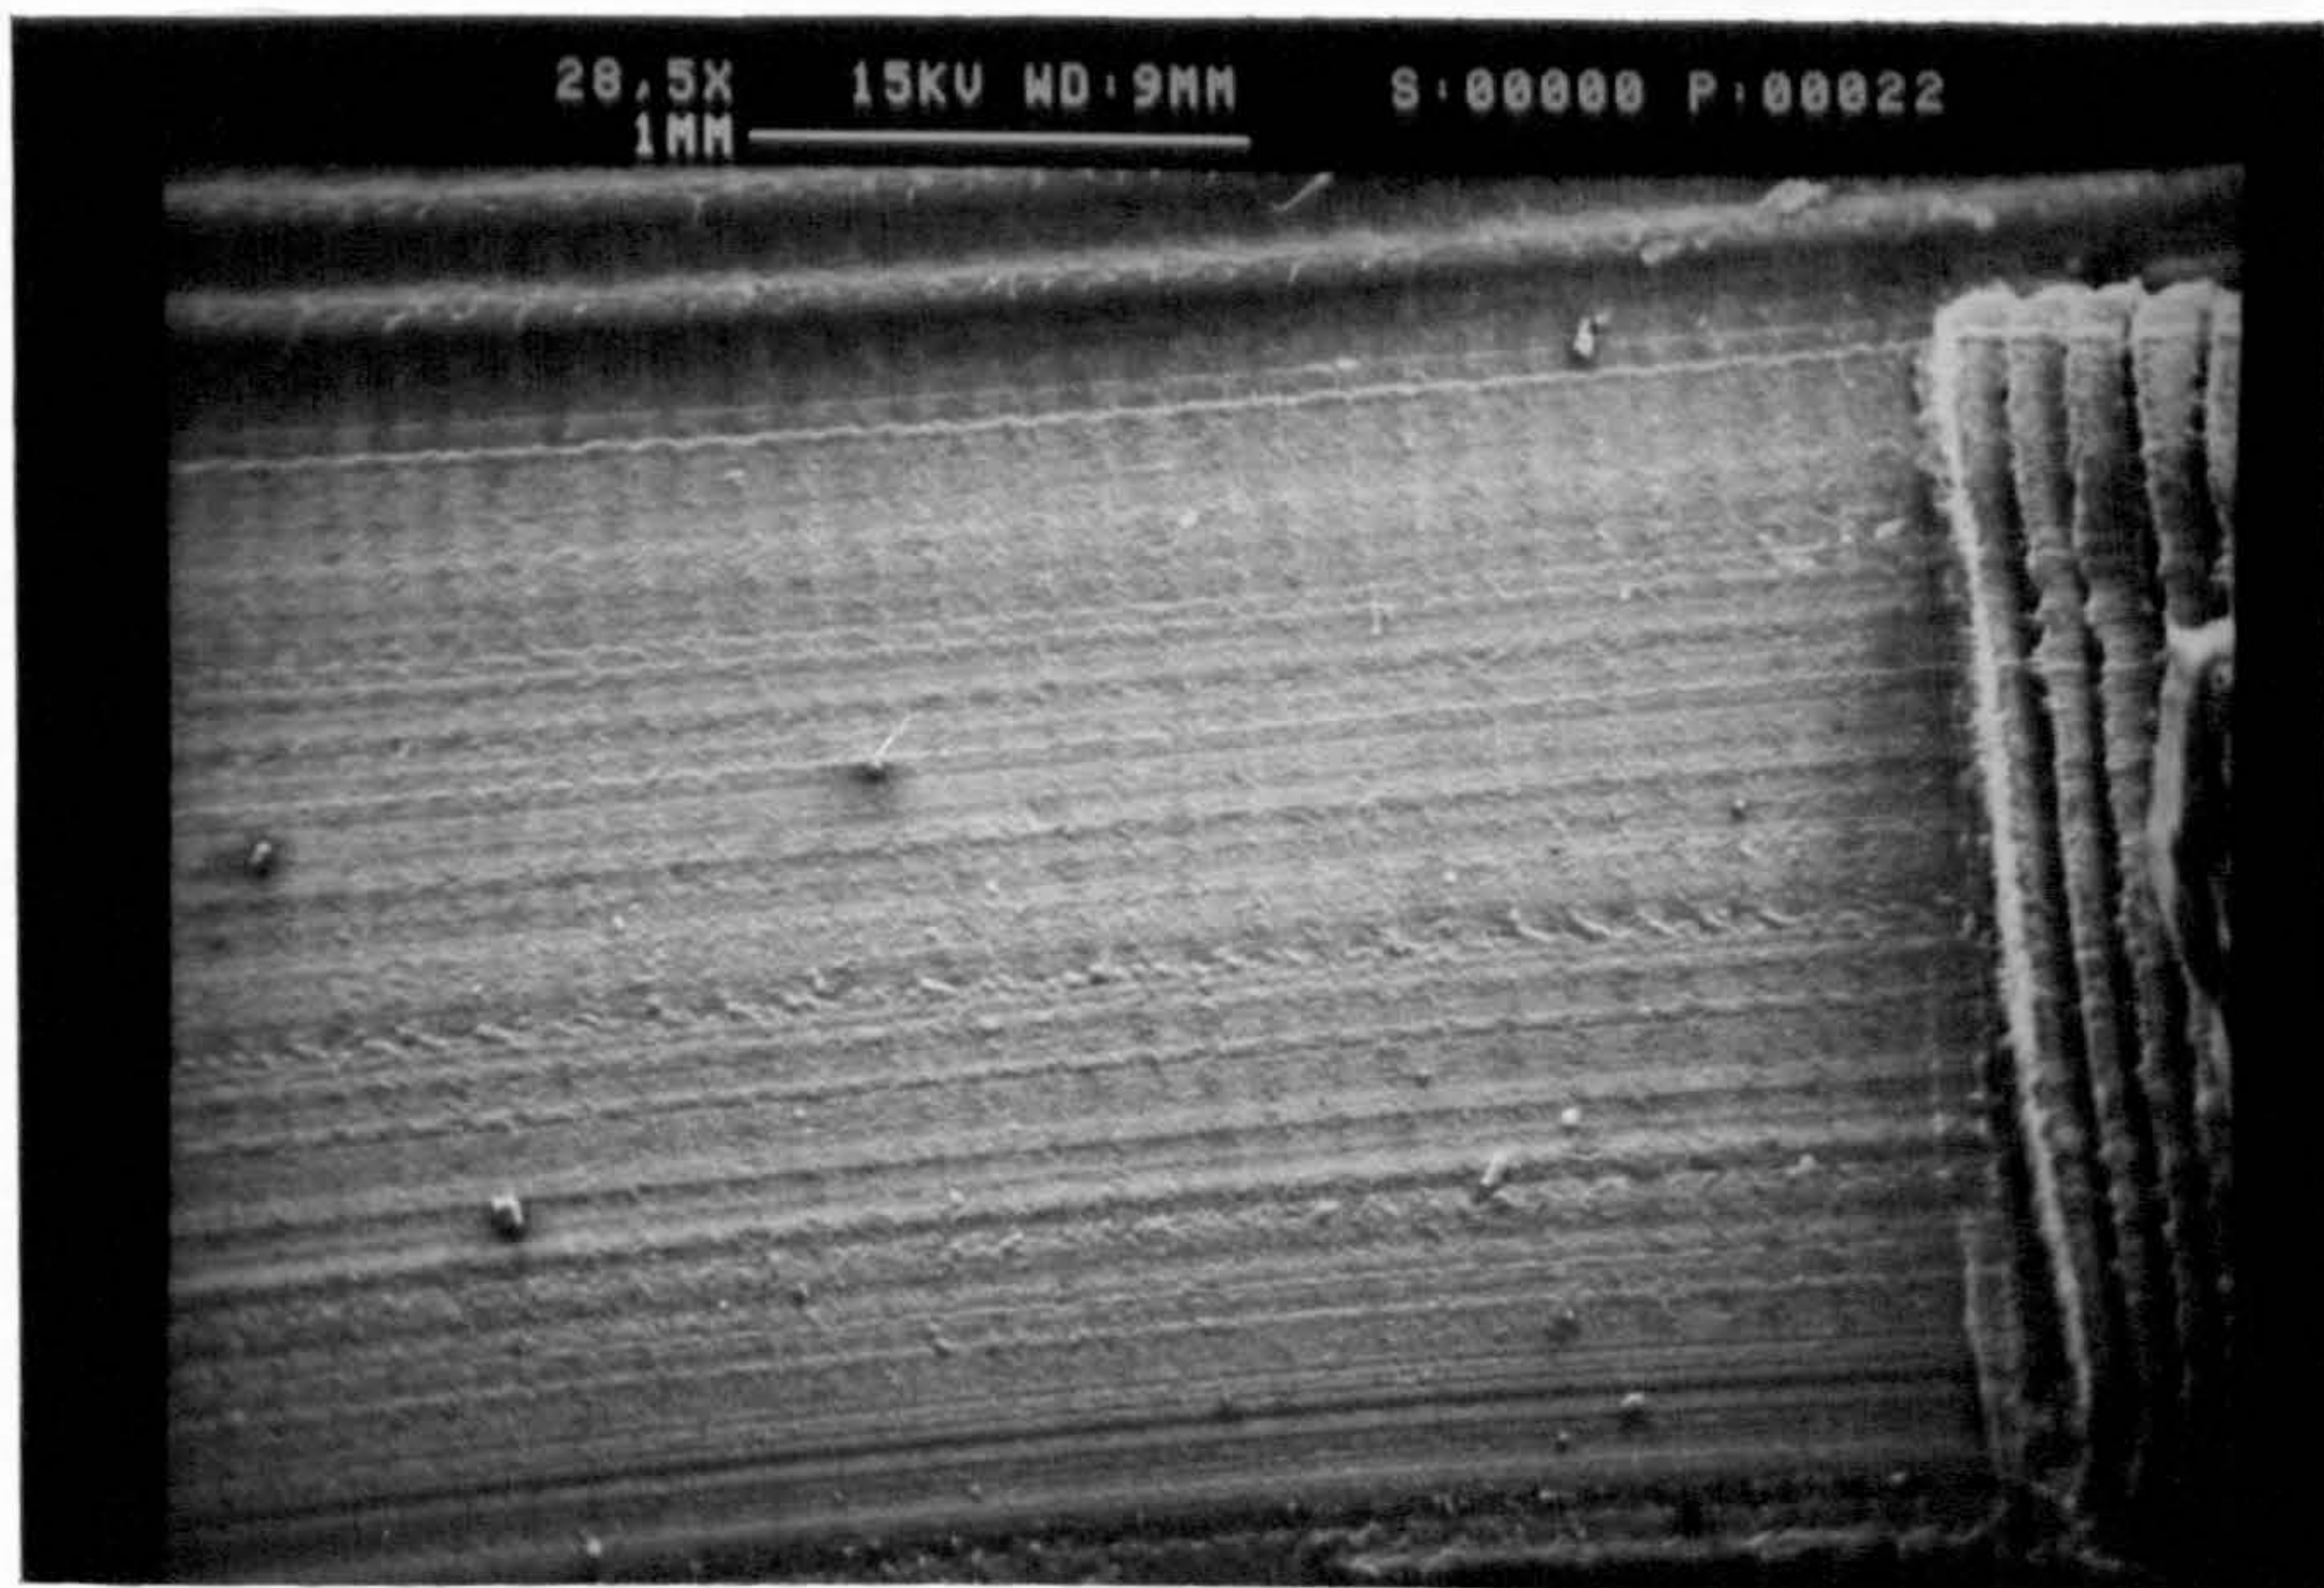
PVC machined surface produced at  $0^\circ$  rake angle showing groove formation. (Speed = 30 m/min, feed = 0.25 mm/rev)
